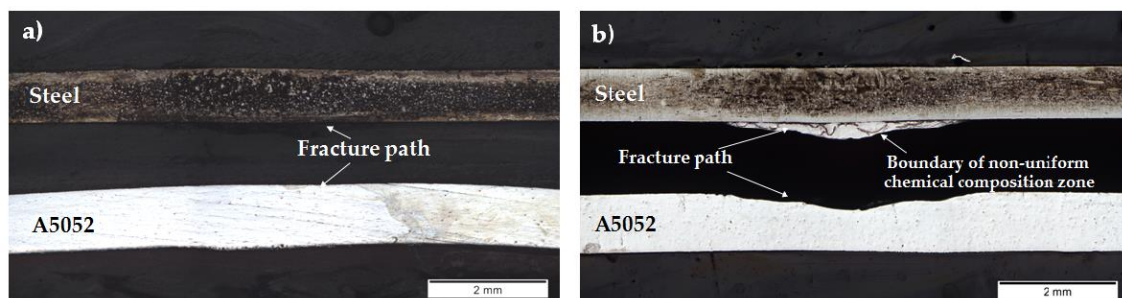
Example of fracture path of welds obtained with 120 A of welding current after tensile-shear test: a) welding between non-zinc-coated steel/A5052, and b) welding between zinc-coated steel/A5052.
